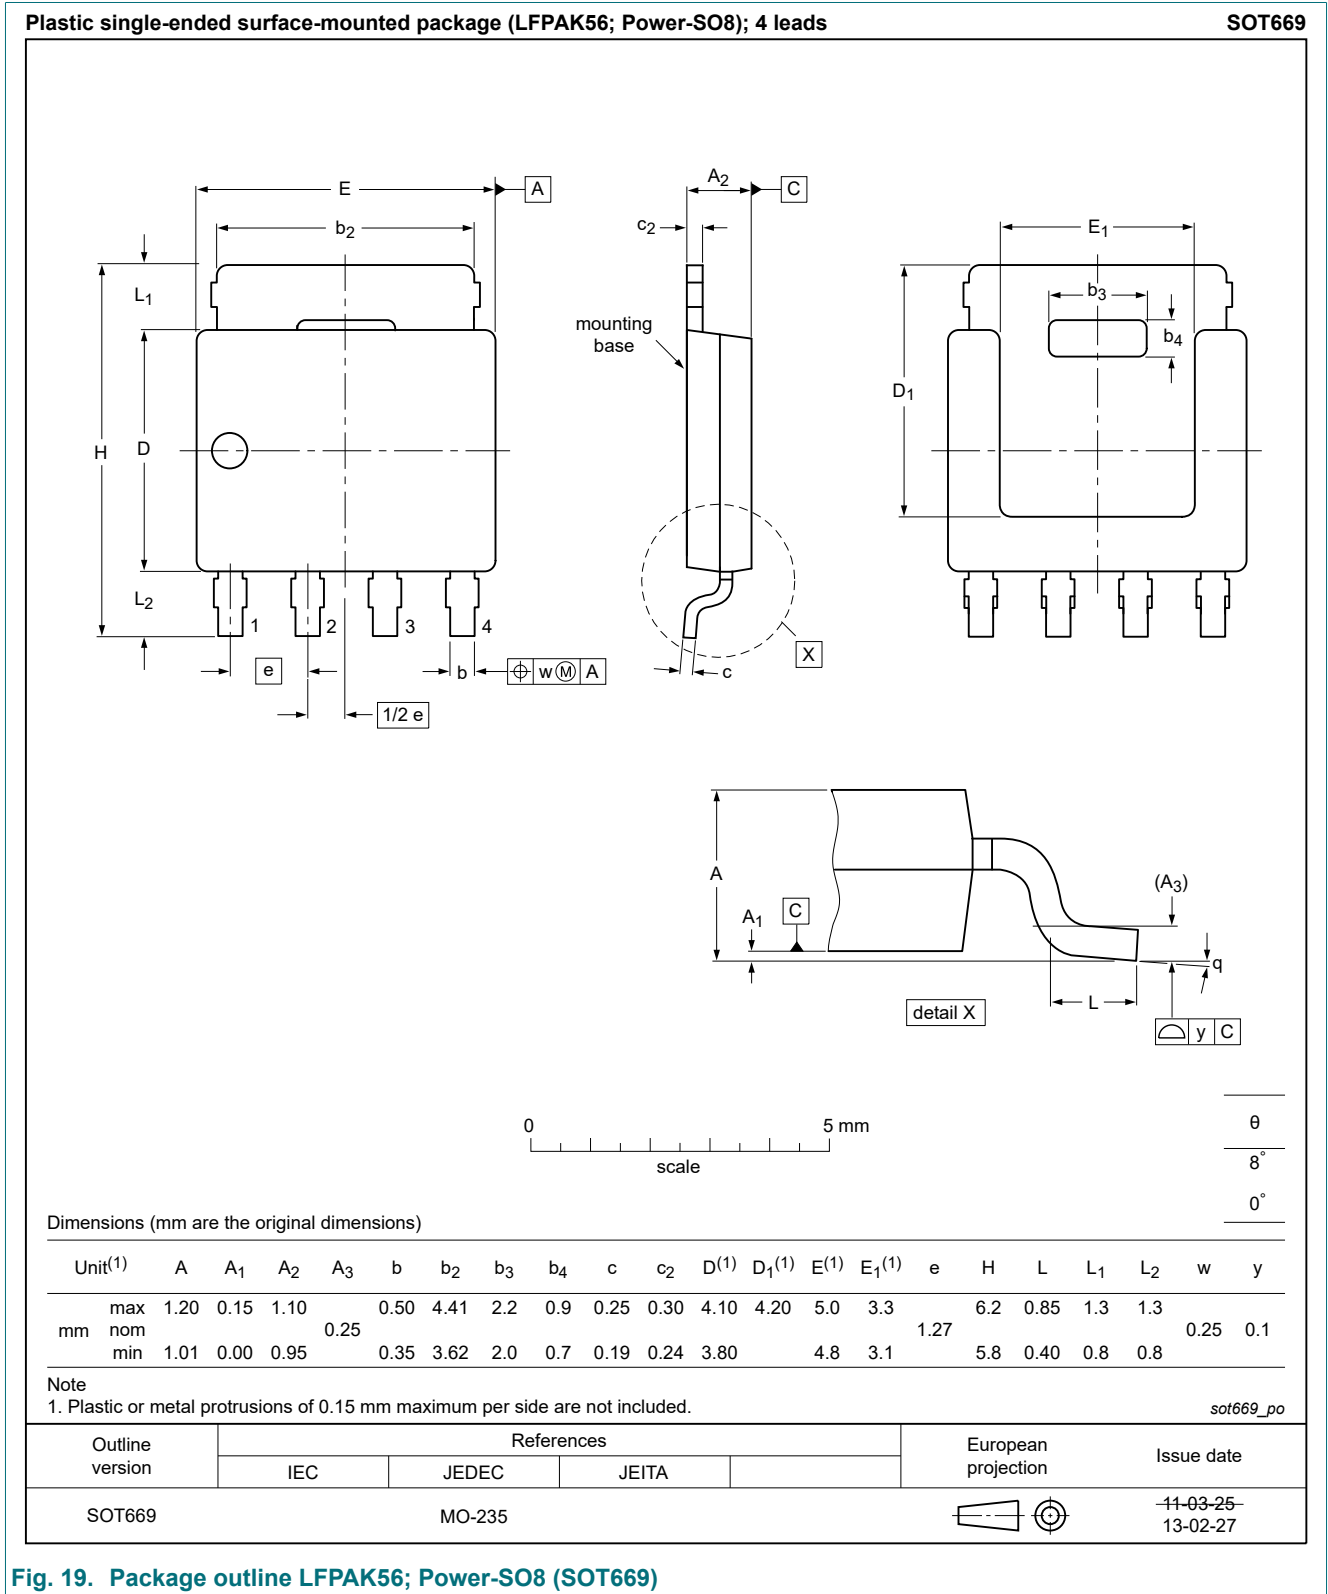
Package outline LPAK56; Power-SO8 (SOT669)
